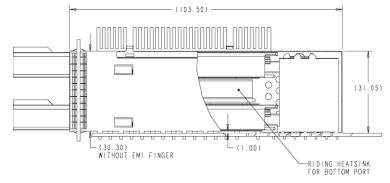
Side partial section view of stacked OSFP-RHS (With host board, connector, cage, module, riding heatsink and panel)
